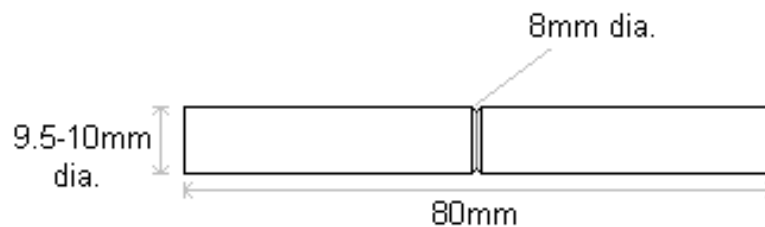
Dimensions of the rod-type Charpy impact test specimens
